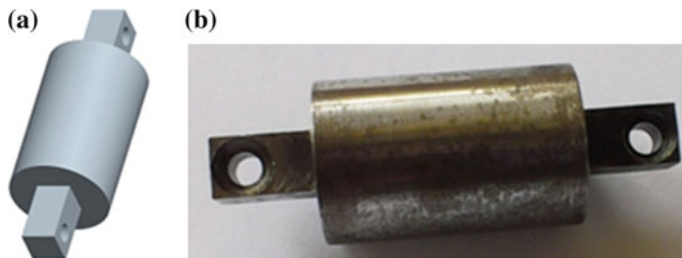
a CAD model of roller bearing, b fabricated roller bearing
